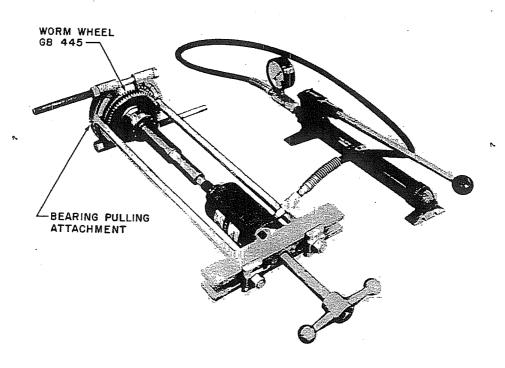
4 to 1 Shaft, Installation of Worm Wheel GB445
